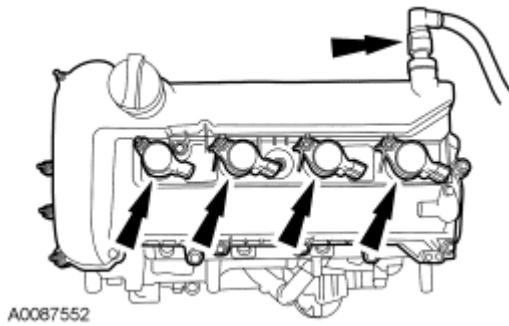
Locating Crankcase Vent Tube And Coil-On-Plugs
